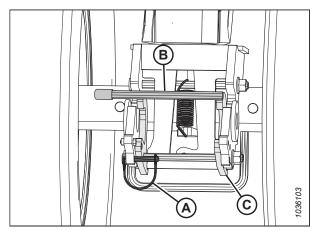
Left Transport Wheels – Rotation Lock Latch Disengaged
